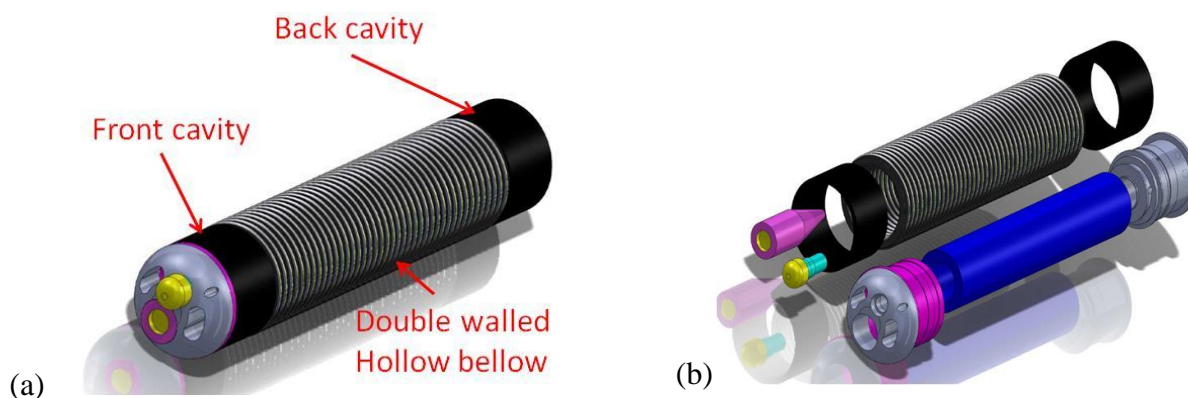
(a) Rendering of crawler, (b) exploded view of crawler assembly [4].
